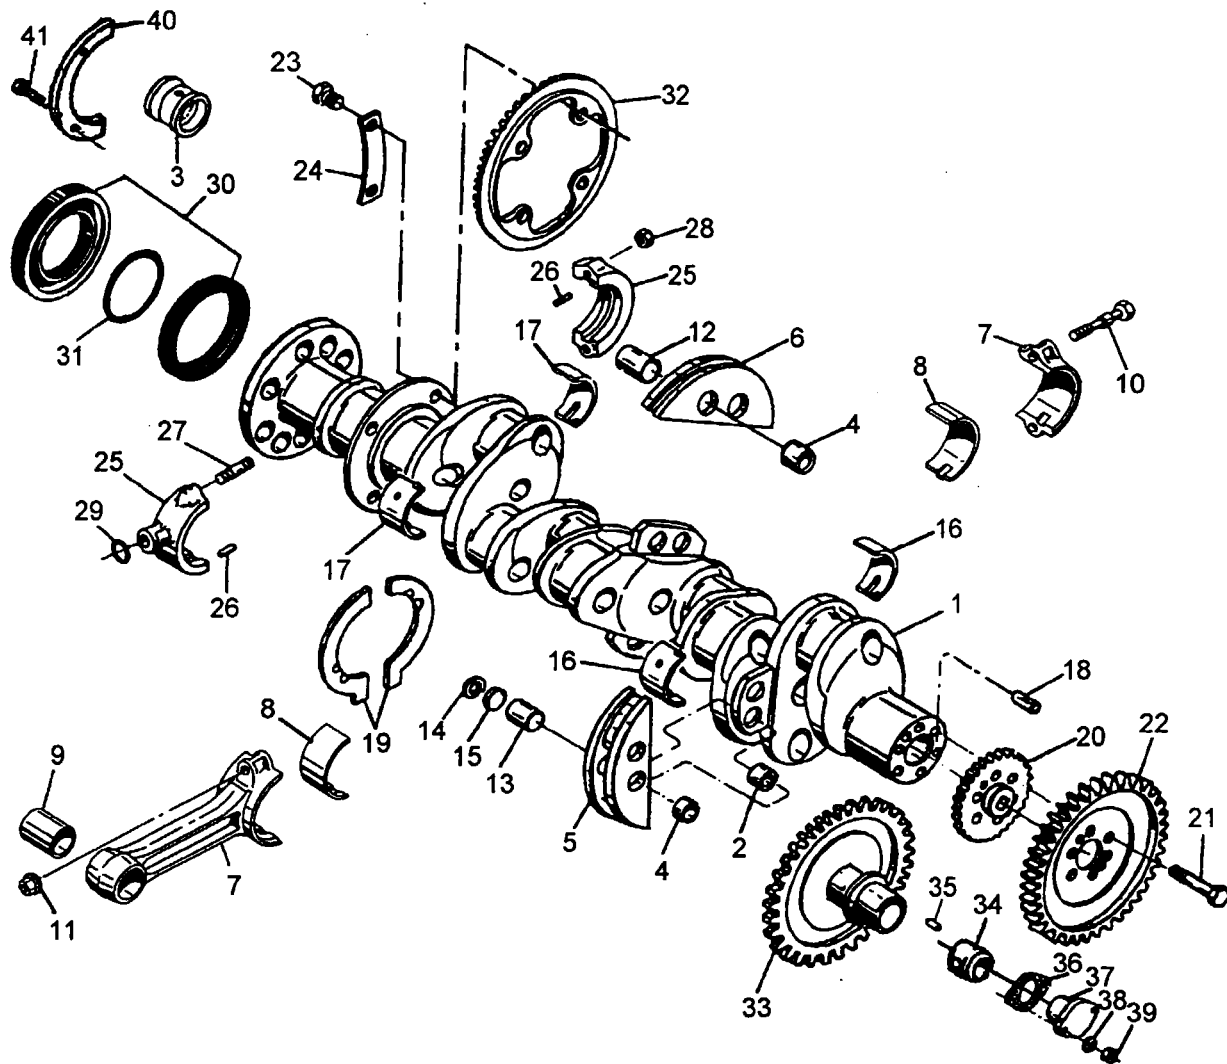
CRANKSHAFT & ASSOCIATED PARTS
